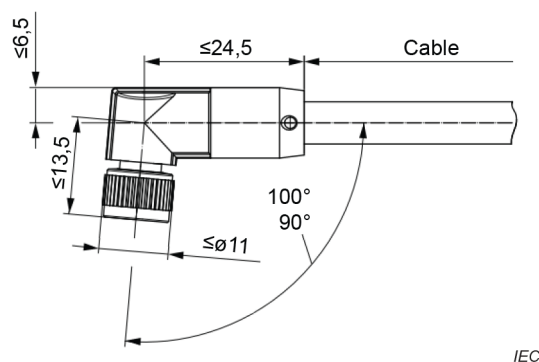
Non-rewireable connector, female contacts, angled version, with locking nut
